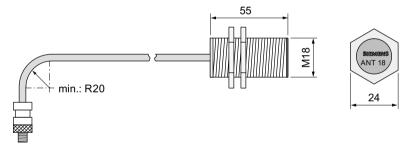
Dimension drawing ANT 18 (all values in mm)
